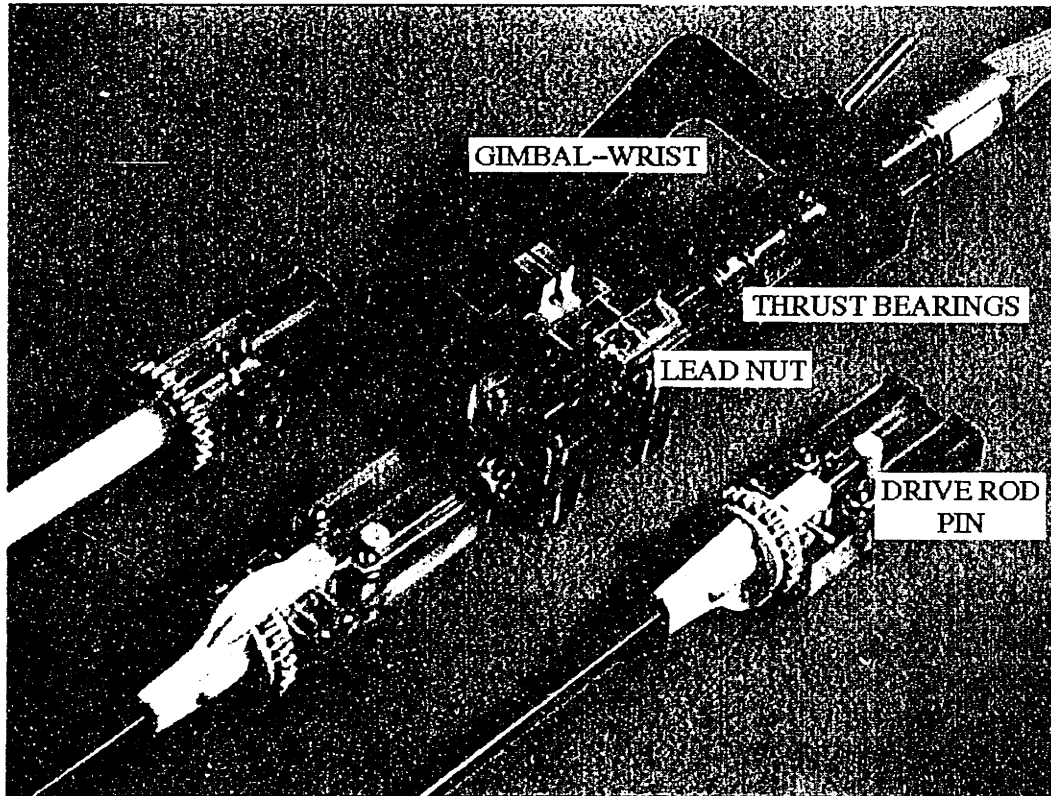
Tool components. Base unit houses drive motors (note thrust bearings for gripper action). Pinion meshes with gear on tool tip blocks, lead nut socket holds drive rod pin.
